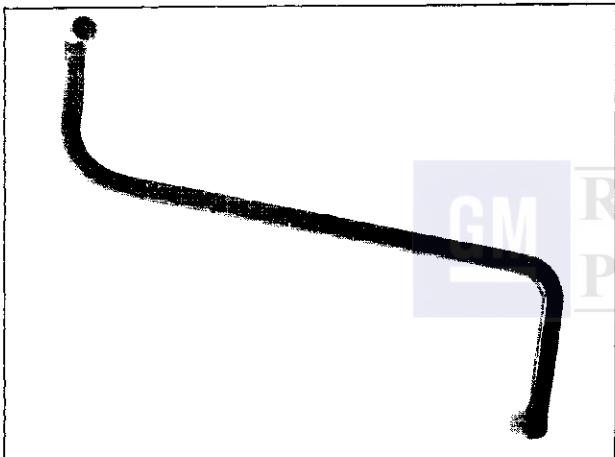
Front Door Hinge Tool J-22810 - "A" Styles
